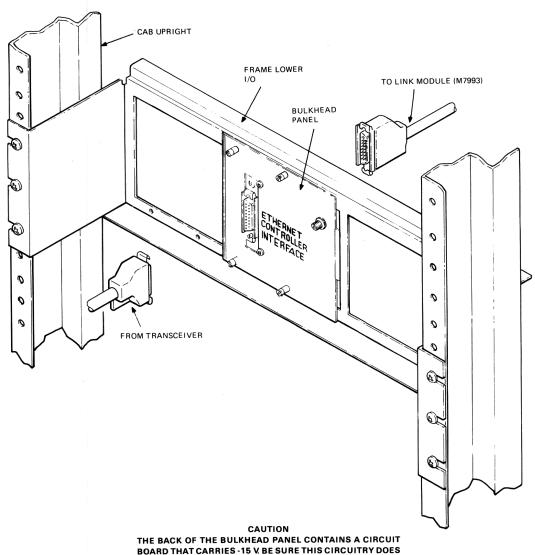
Bulkhead Interconnect I/O Panel Assembly
